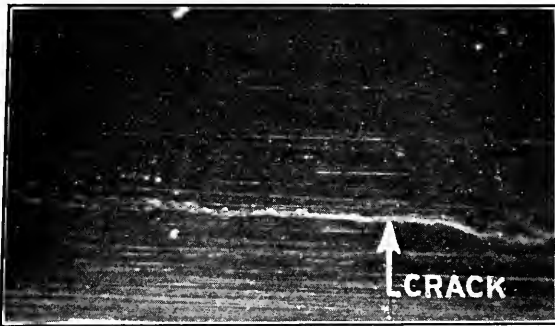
Fatigue crack in car-axle steel.
